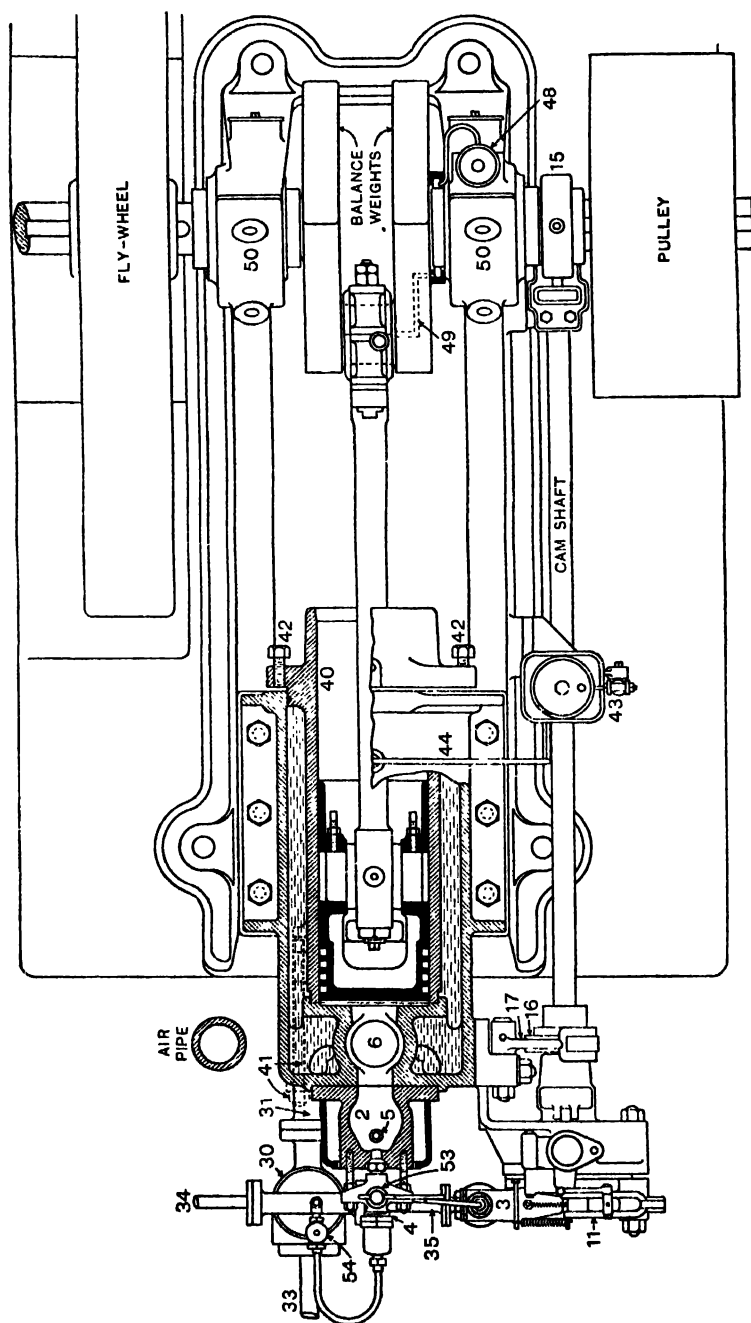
The Campbell high compression oil engine. Sectional plan.
